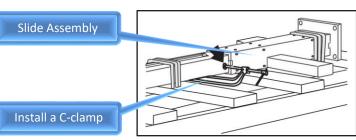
, Attach C-clamp to column. KEEP SLIDE ASSEMBLY FROM MOVING DURING ASSEMBLY.
